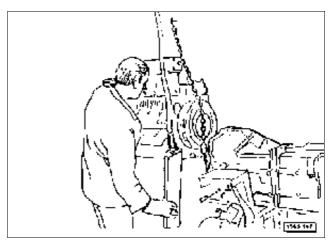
Using a hoist, position the engine in contact with the intermediate housing.
